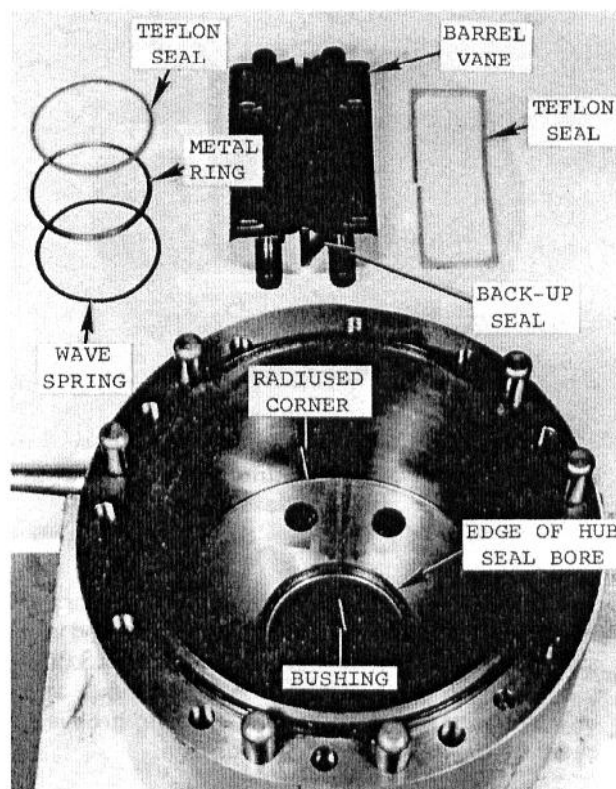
Barrel Vane (With Related Parts) and Hub Seals Removed From Cylinder
